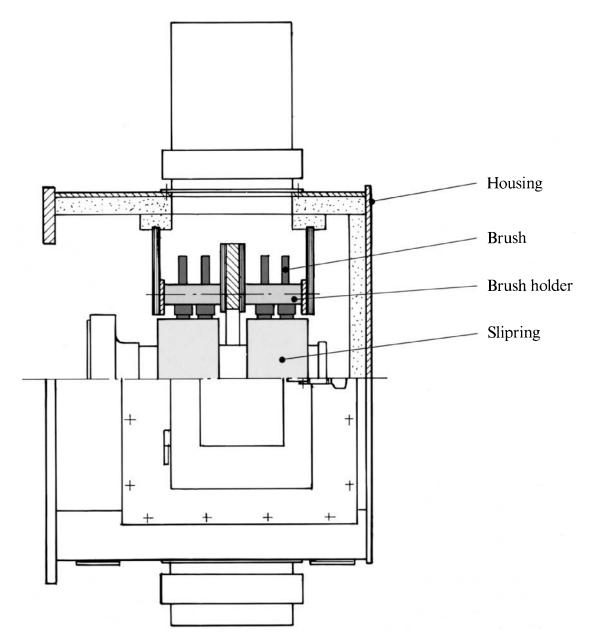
Slipring assembly detail. (Source: Alstom.)
